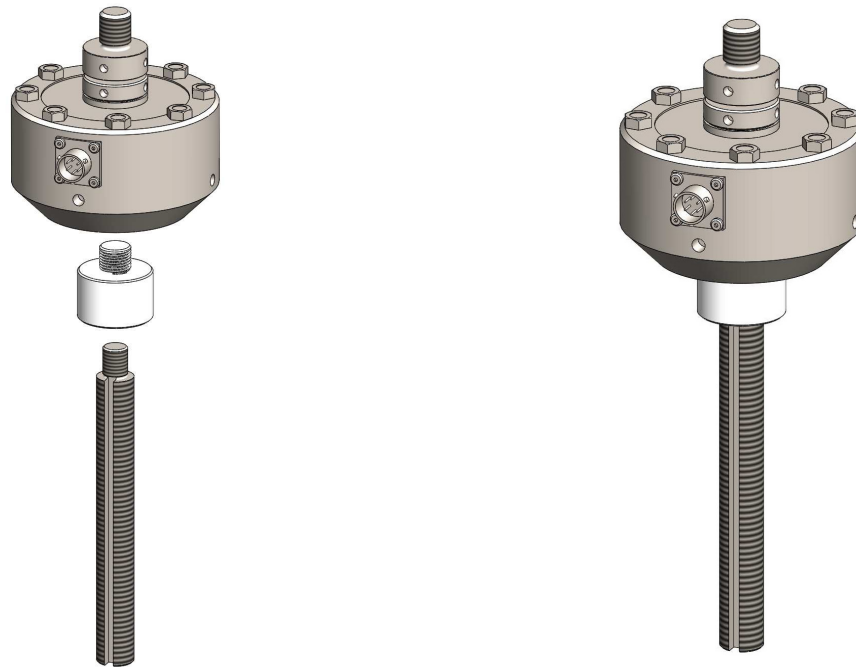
Installation of Reference Load Cell Using the Standard Mounting Adapter
